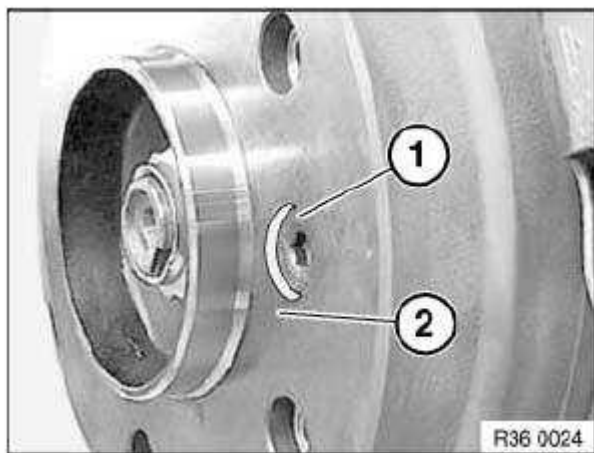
Brake Disk Retaining Bolt And With Contact Surface
